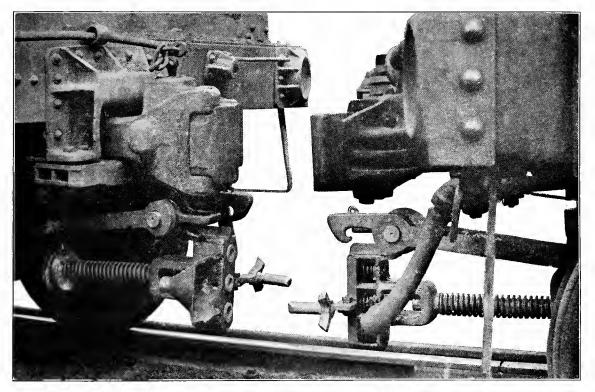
Barnett Automatic Connector for Air Brake, Signal and Steam Heat Pipes, with Automatic Safety Coupling Hook. Barnett Equipment Company.
